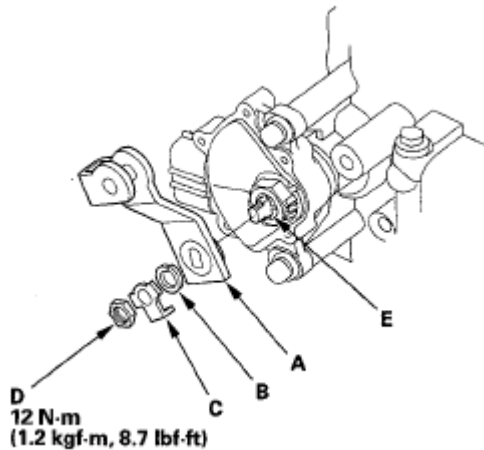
Identifying Control Lever, Spring Washer, Lock Washer And Locknut With Torque Specifications
